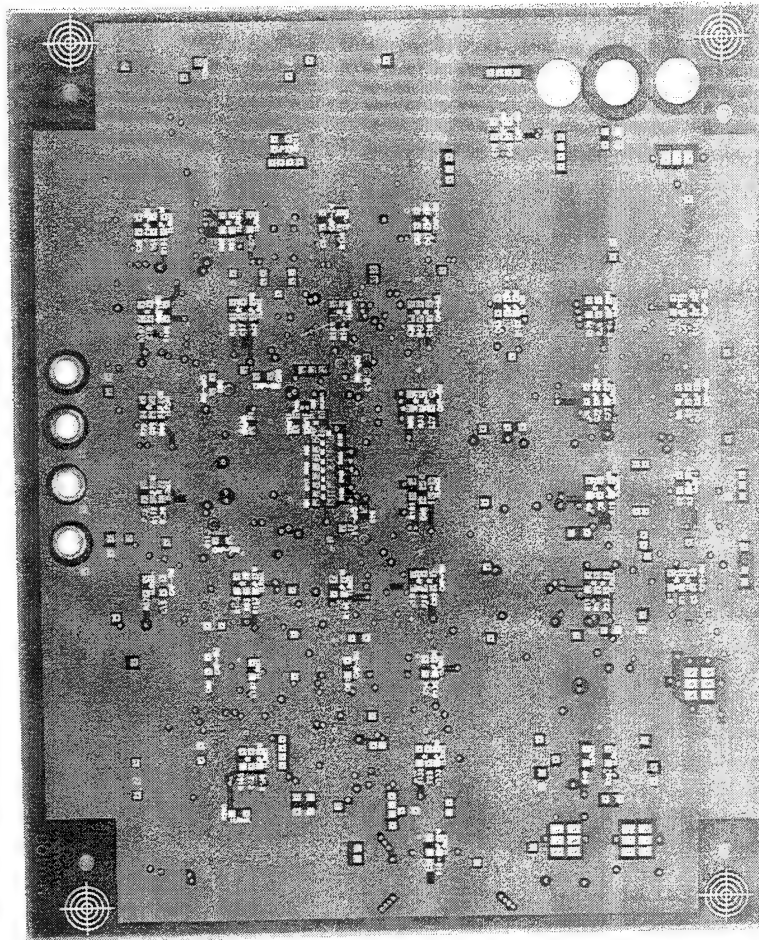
PRINTED CIRCUIT BOARD (BOTTOM VIEW)
